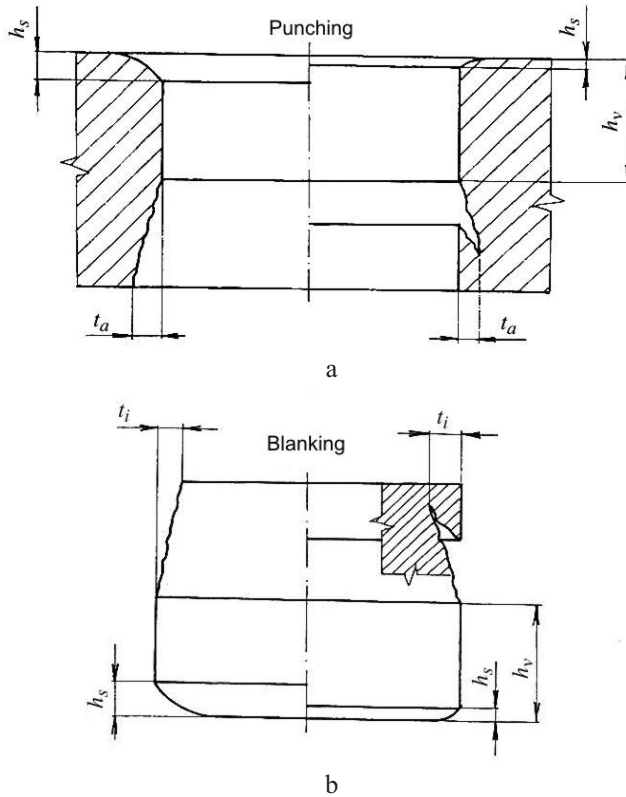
Shape of the cutting surface with the large and the small cutting gap.
